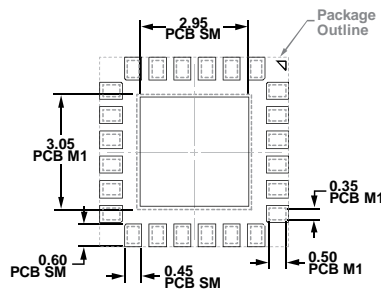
24-Terminal Chip Array Small Outline No Lead Cavity [LGA_CAV]
